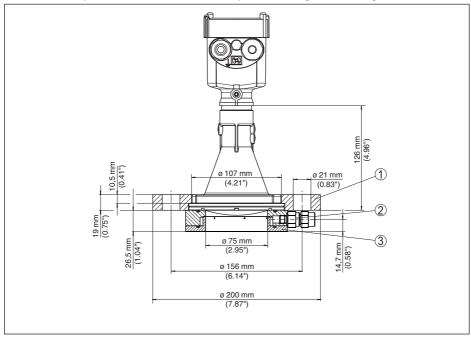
Radar sensor with compression flange suitable for flanges 3" 150 lbs, DN 80 PN 16
